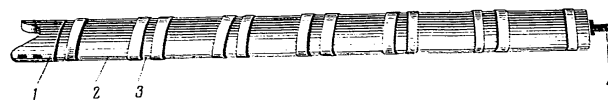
WEIGHT ARRANGED INSIDE BLADE SPAR
